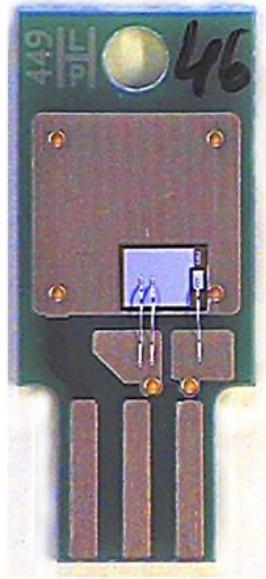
Die mounted on PCB for TID testing – soldered and wire-bonded
